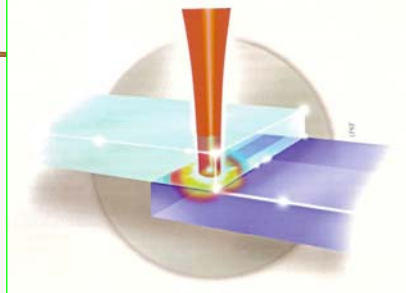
| Principle of laser transmission welding of two plastic components. The laser beam passes through the upper plastic layer but is absorbed by the lower one, generating heat that fuses the two components together, which then cool and harden.
